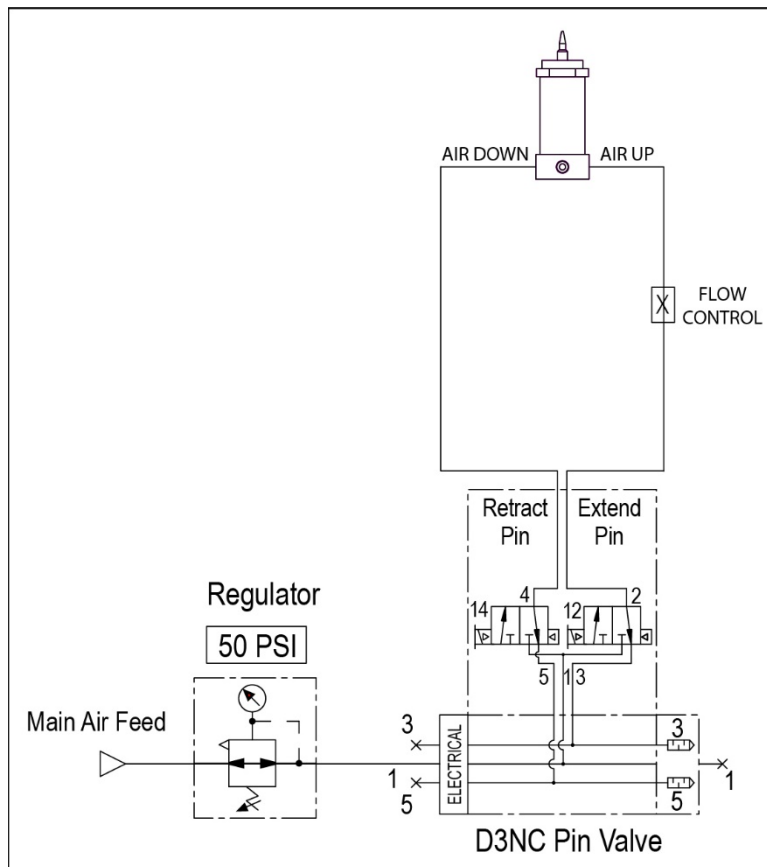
Pneumatic Connection Diagram for LVDT Weld Body with Retractable Pin, using D3NC Valve (Not applicable to Clamp Mount Assembly)
